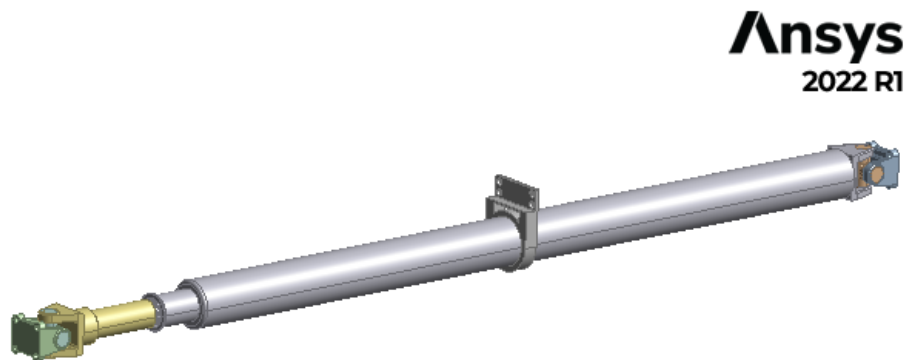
Geometry of the one-piece modified shaft with center bearing imported to ANSYS
